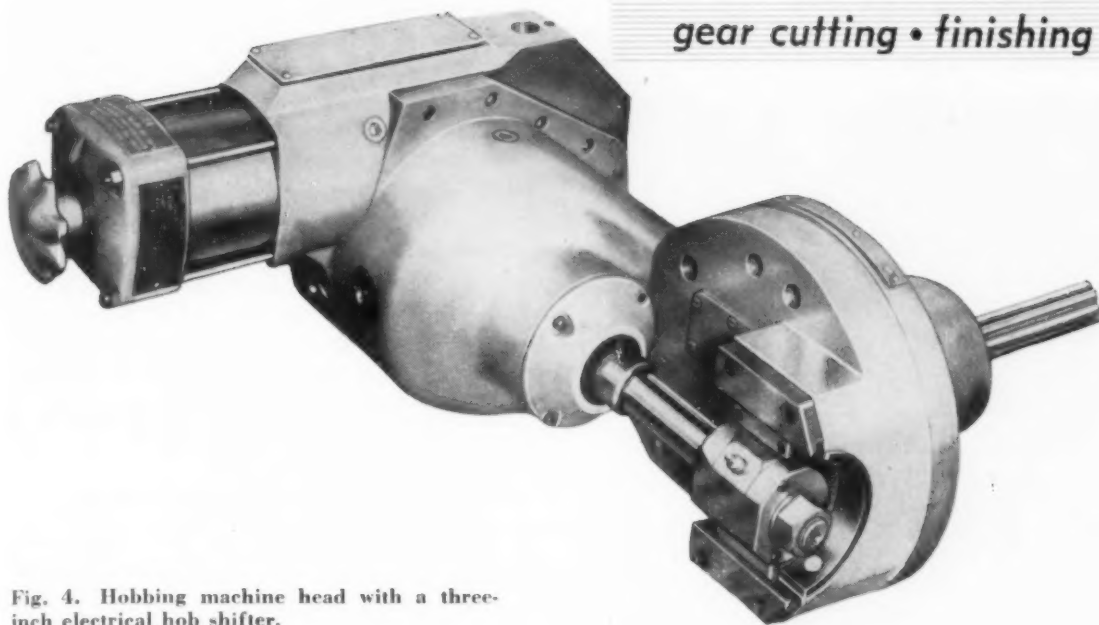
Hobbing machine head with a three-inch electrical hob shifter.
